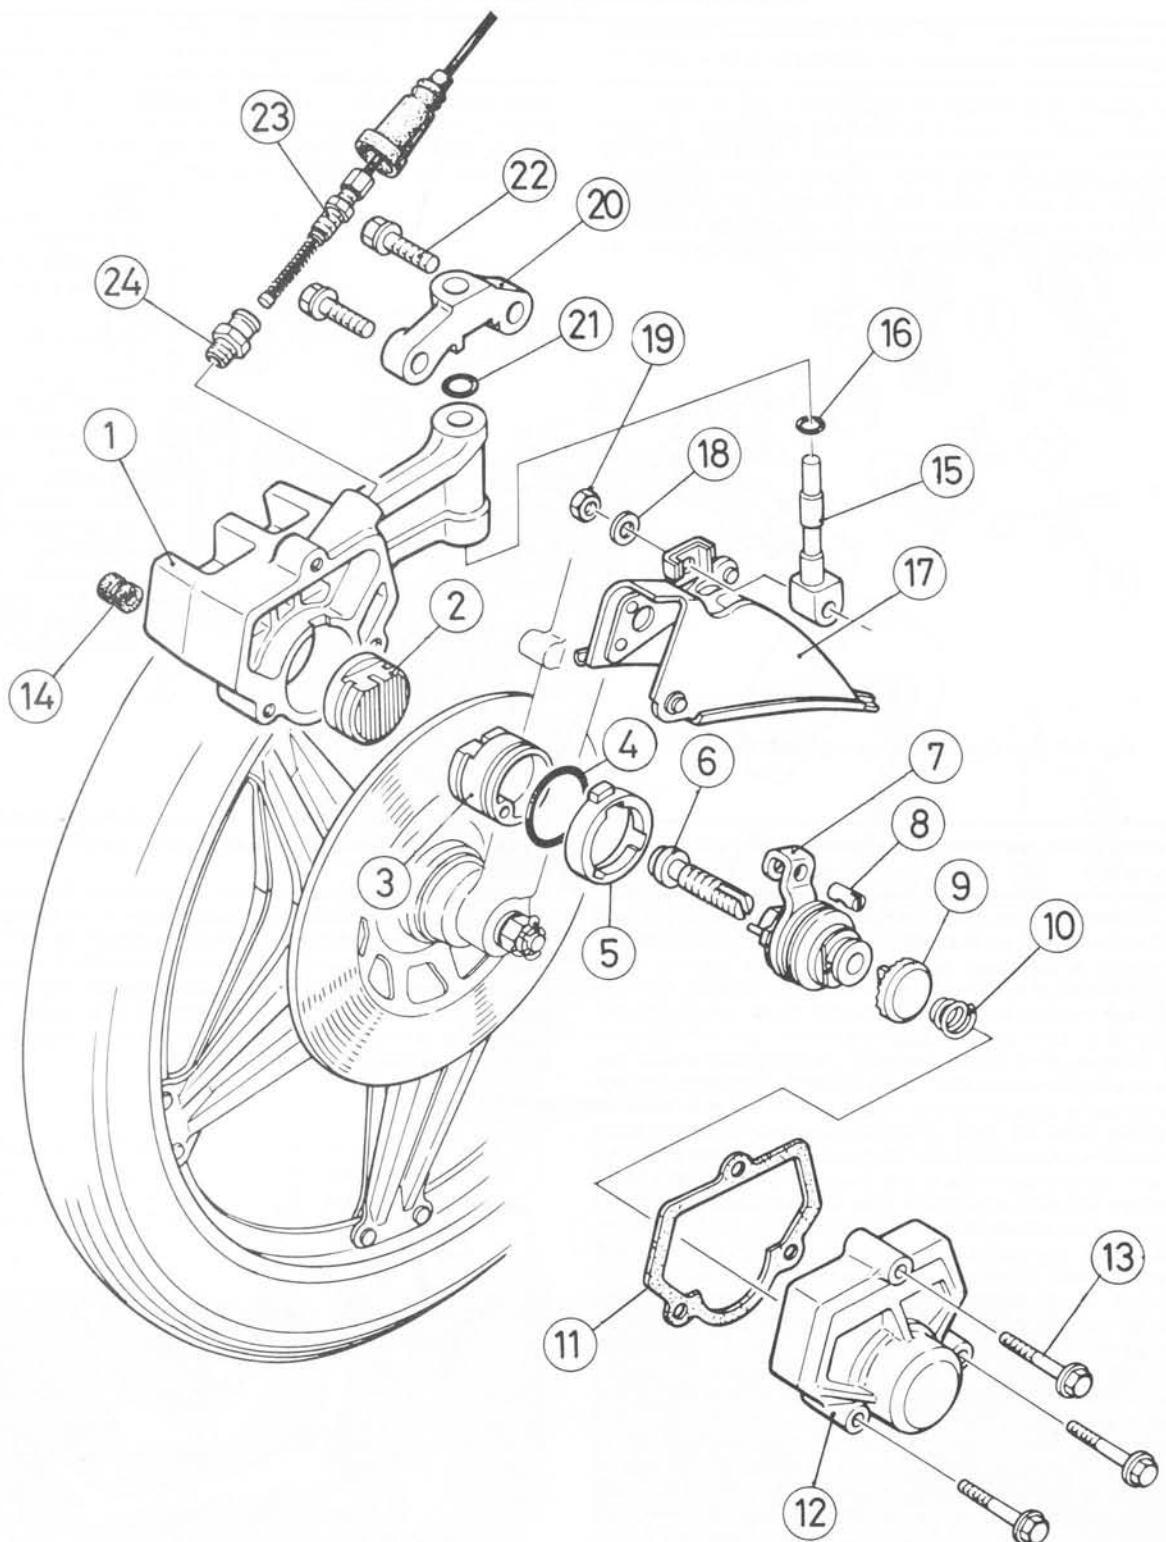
Front disc brake – CB125 T2, TA and TB (CB125 T similar)
